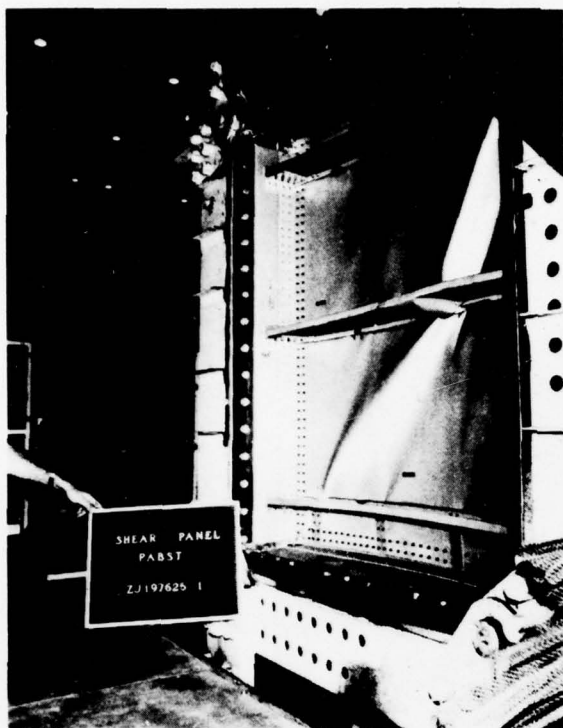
SHEAR TEST FAILURE - BACK VIEW
